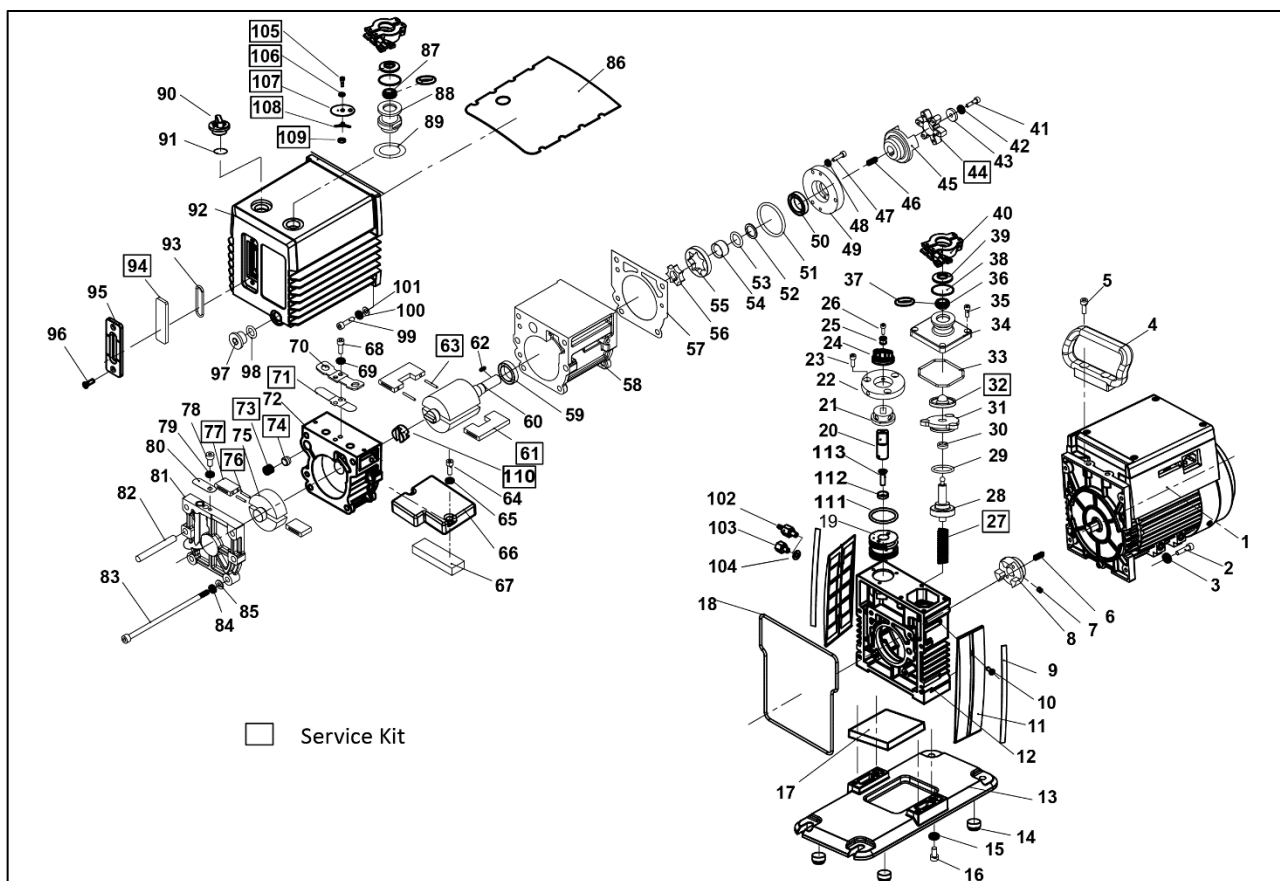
Explosion view - Rotary vane pump with service kit – positions (RV3+, RV6+, RV8+)
